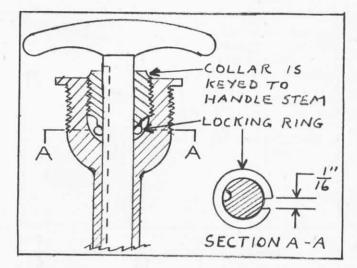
Locking Type Control Cable Head should be adjusted to allow full stroke of valve spool (one inch) before cable itself reaches end of stroke.
